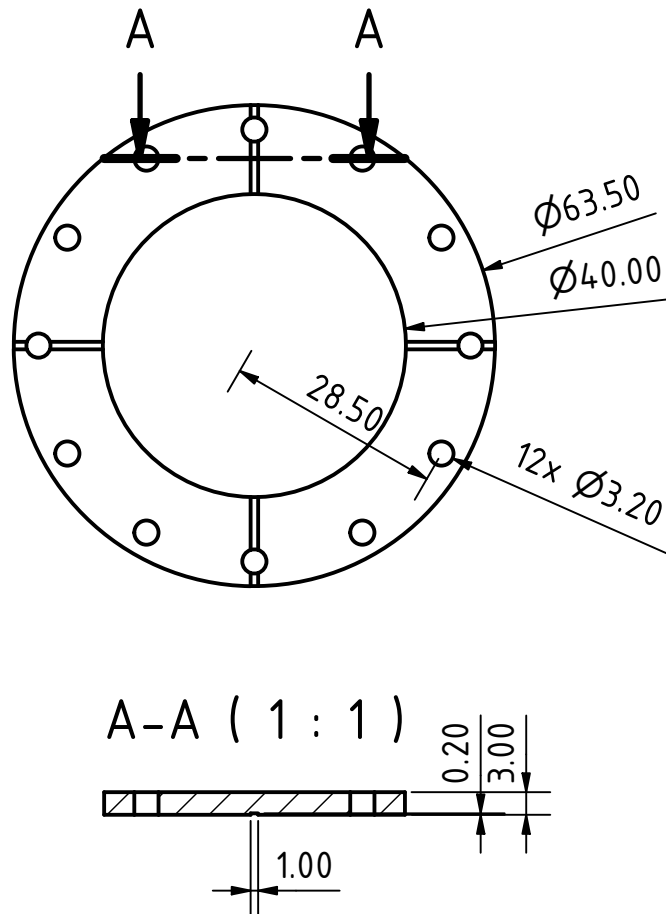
Technical drawing of the cover of the upscaled valve: top view (top) and section view (bottom) with scale 1:1. All dimensions in mm.
